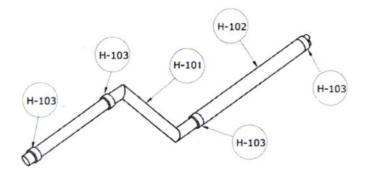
H-101 Handle shaft, H-102 Handle grip, H-103 Stopper rings
